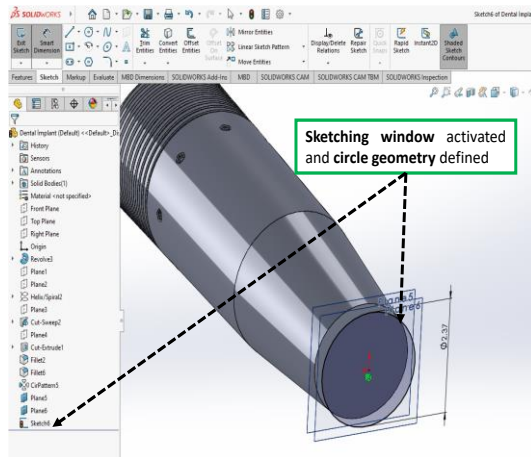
Drawing of the 2D circular geometry on the bottom surface of the dental implant
